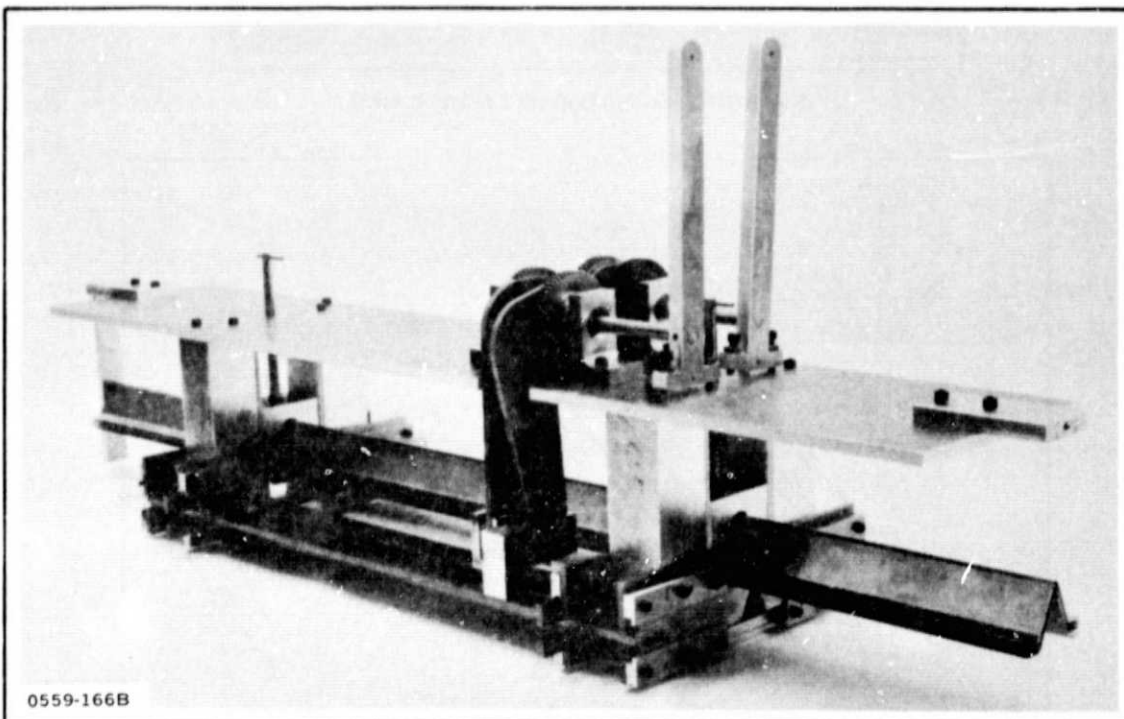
Magazine/Dispensing Mechanism Fixture
